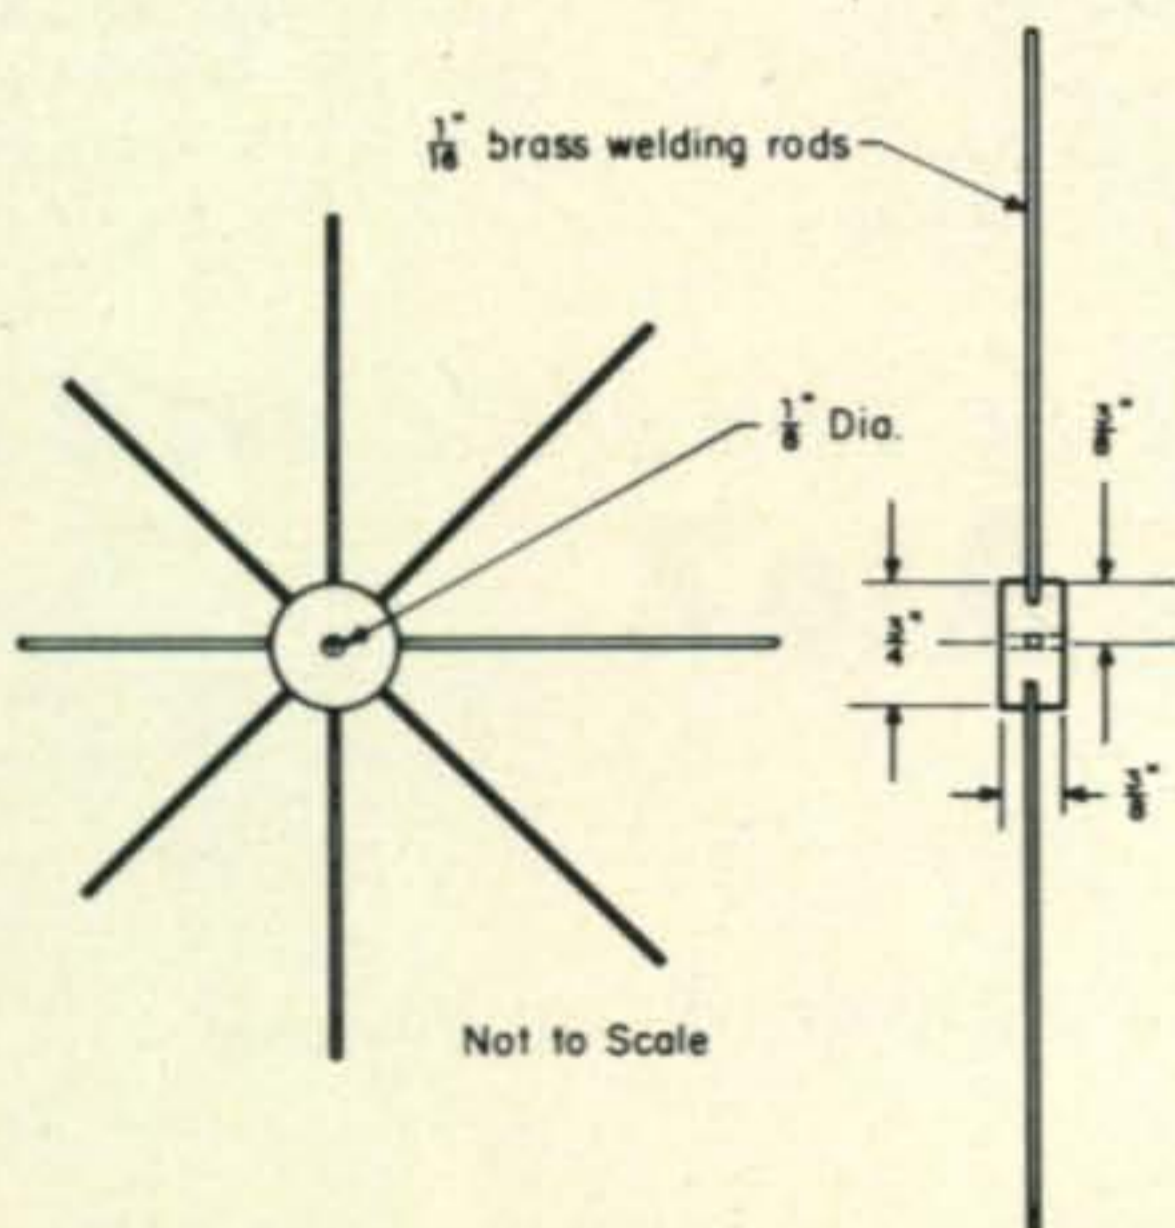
Disc element. The disc hub is made from a 1/4" section of 3/4" dia. brass rod. Radials are 1/16" brass welding rod soldered to the hub. At the higher bands, a solid brass or aluminum sheet disc element would be more convenient to construct.
